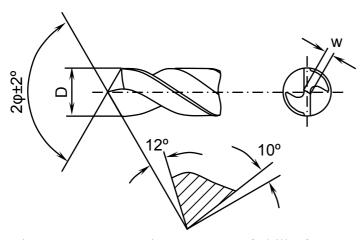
Geometric parameters of drills for machining of holes in workpieces from hard-to-machine materials
